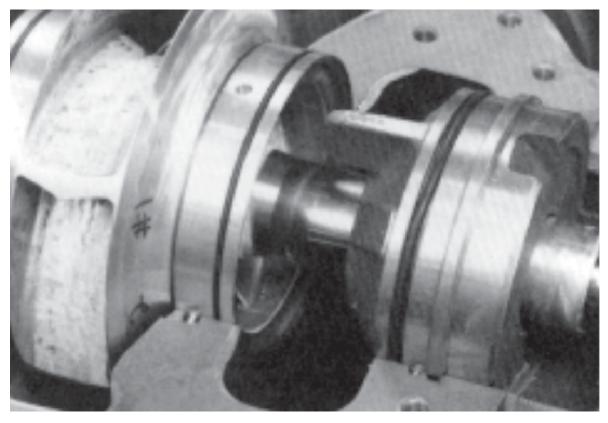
Rotating element — pump with mechanical seals on the shaft sleeves
